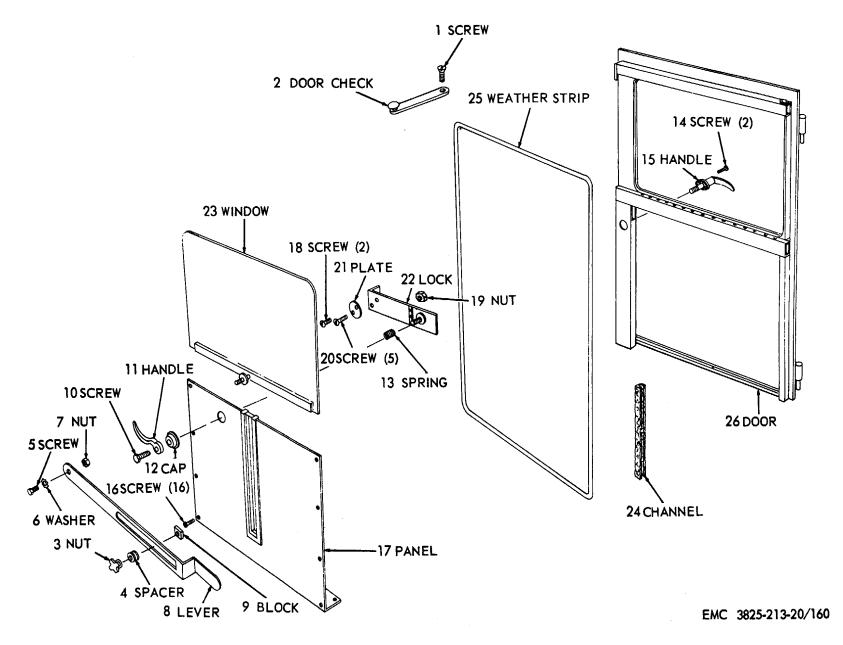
Cab right and left door, disassembly and reassembly, exploded view.
